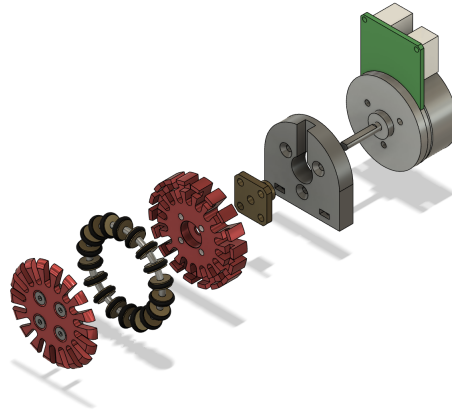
From left to right: a) the top of the wheel with four countersunk hex bolt, b) ring with mini-wheels, c) base of the wheel, d) commercial coupling, e) a base to attach motor and f) the motor.
